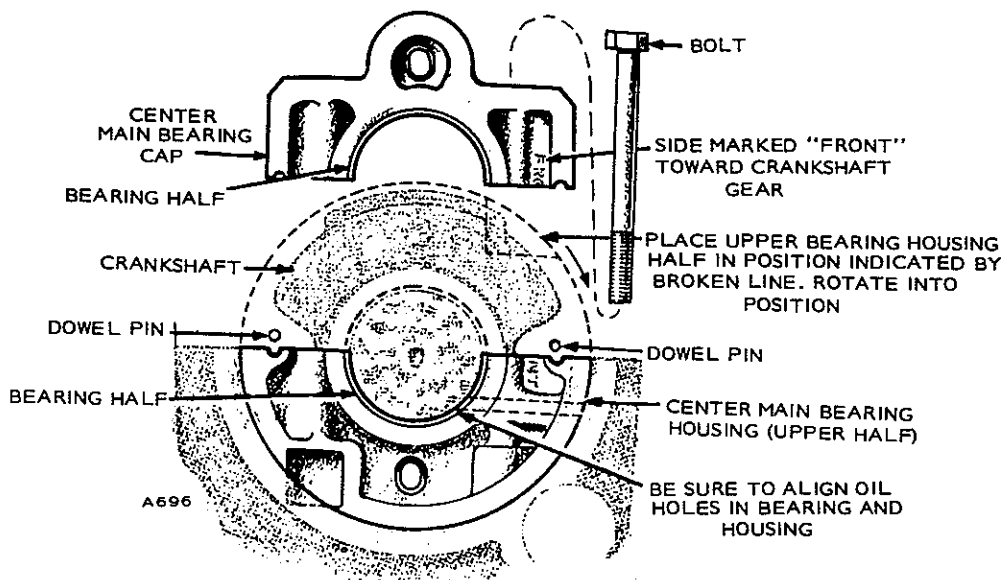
CENTER MAIN BEARING INSTALLATION—J-SERIES
